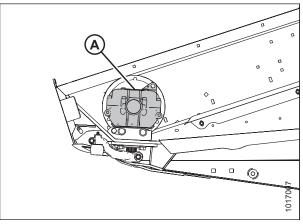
Left Side Knife Drive Box Shown – Right Side Similar
